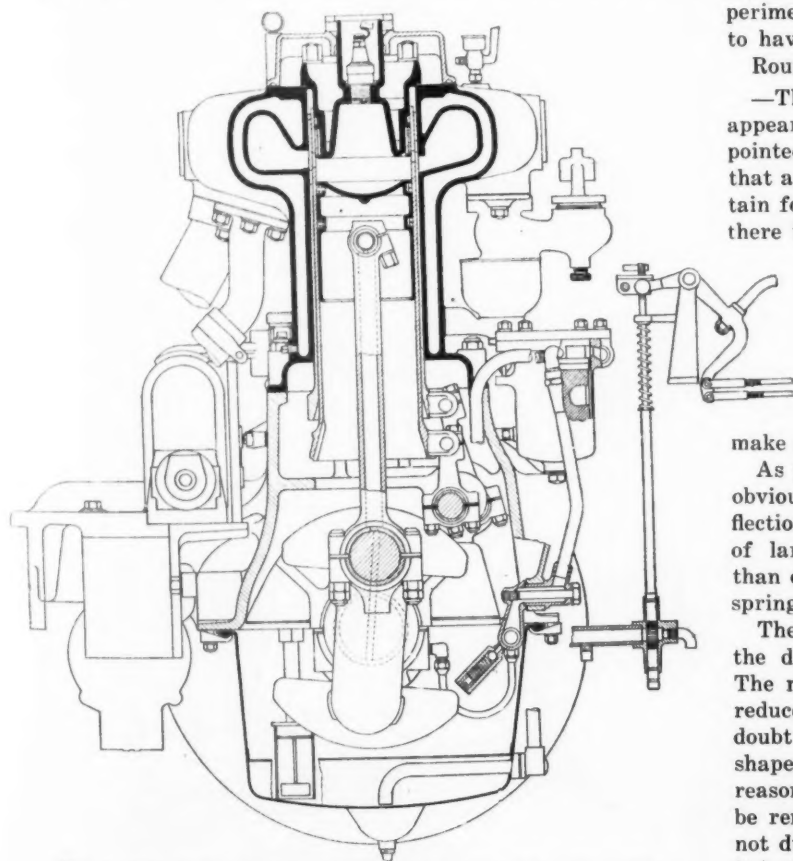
Transverse section through Stearns-Knight six-cylinder engine
